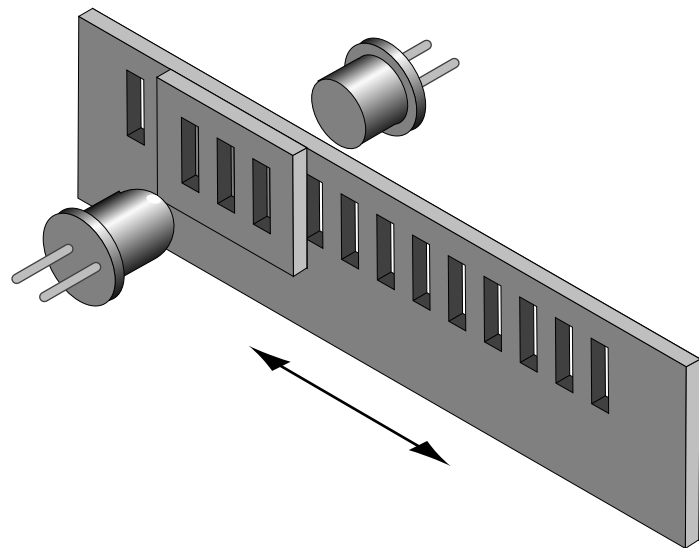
Single-Channel Optical Encoder Scale and Read Head Assembly
